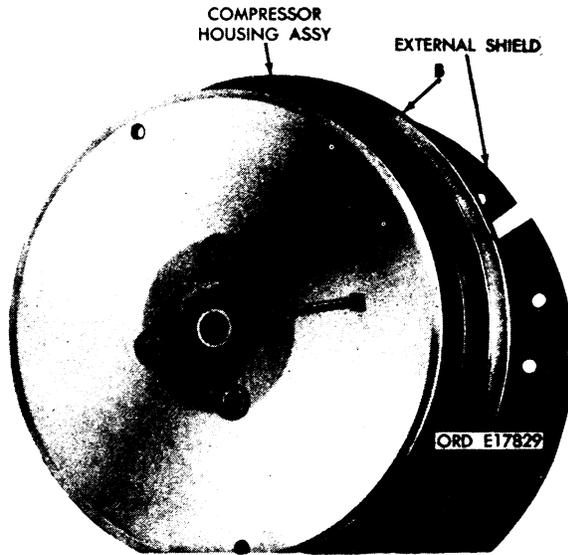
REMOVING COMPRESSOR HOUSING ASSEMBLY - TURBOCHARGERS 7748900 AND 10935279.
